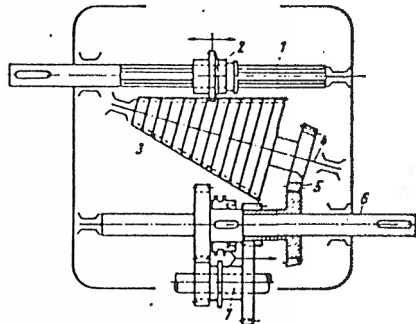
Sliding gearbox (from *Stanki I Instrument*, December 1958).
